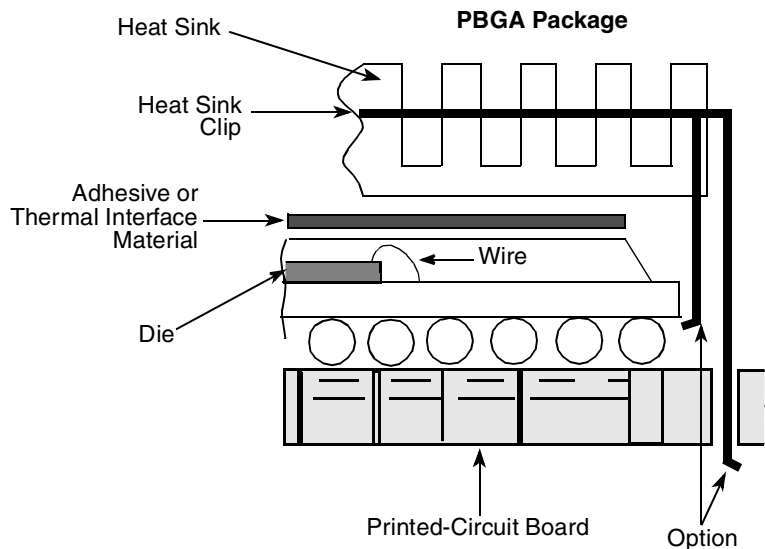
Package Exploded Cross-Sectional View with Several Heat Sink Options
